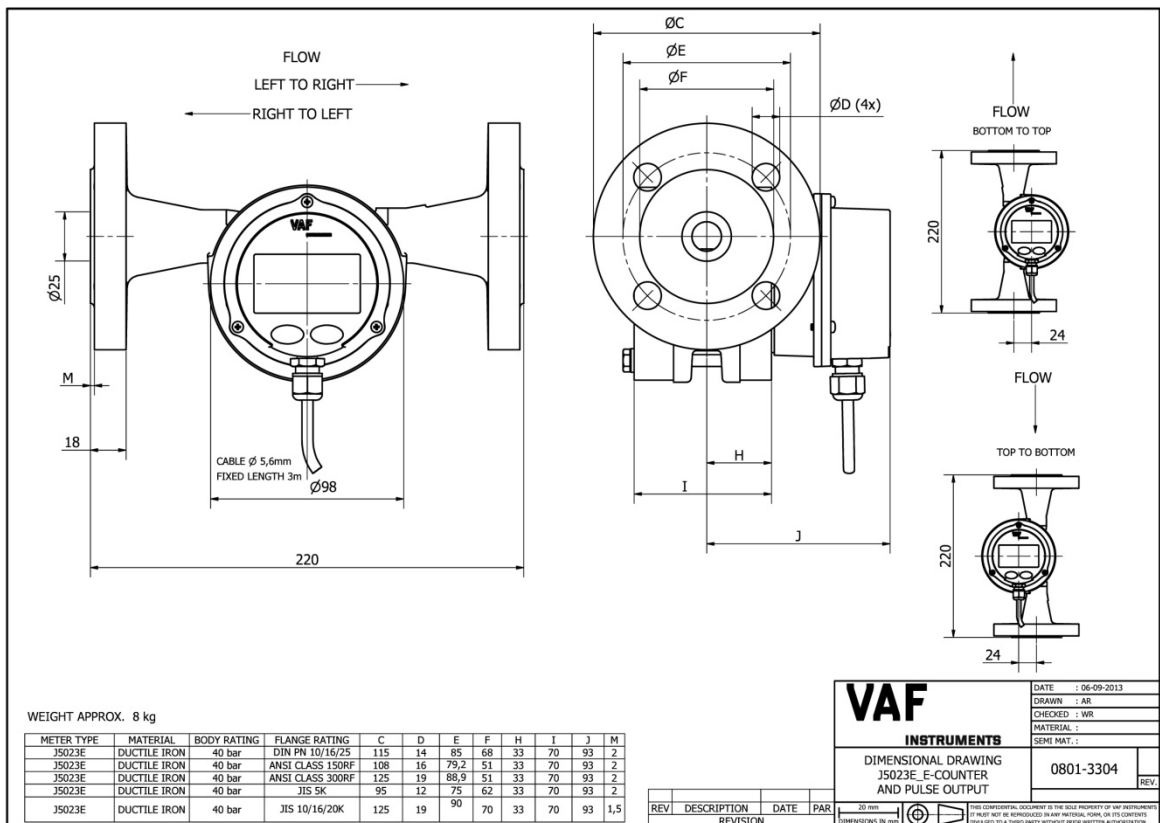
Drawing 0801-3304 – Dimensional drawing J5023E E-counter with pulse output
